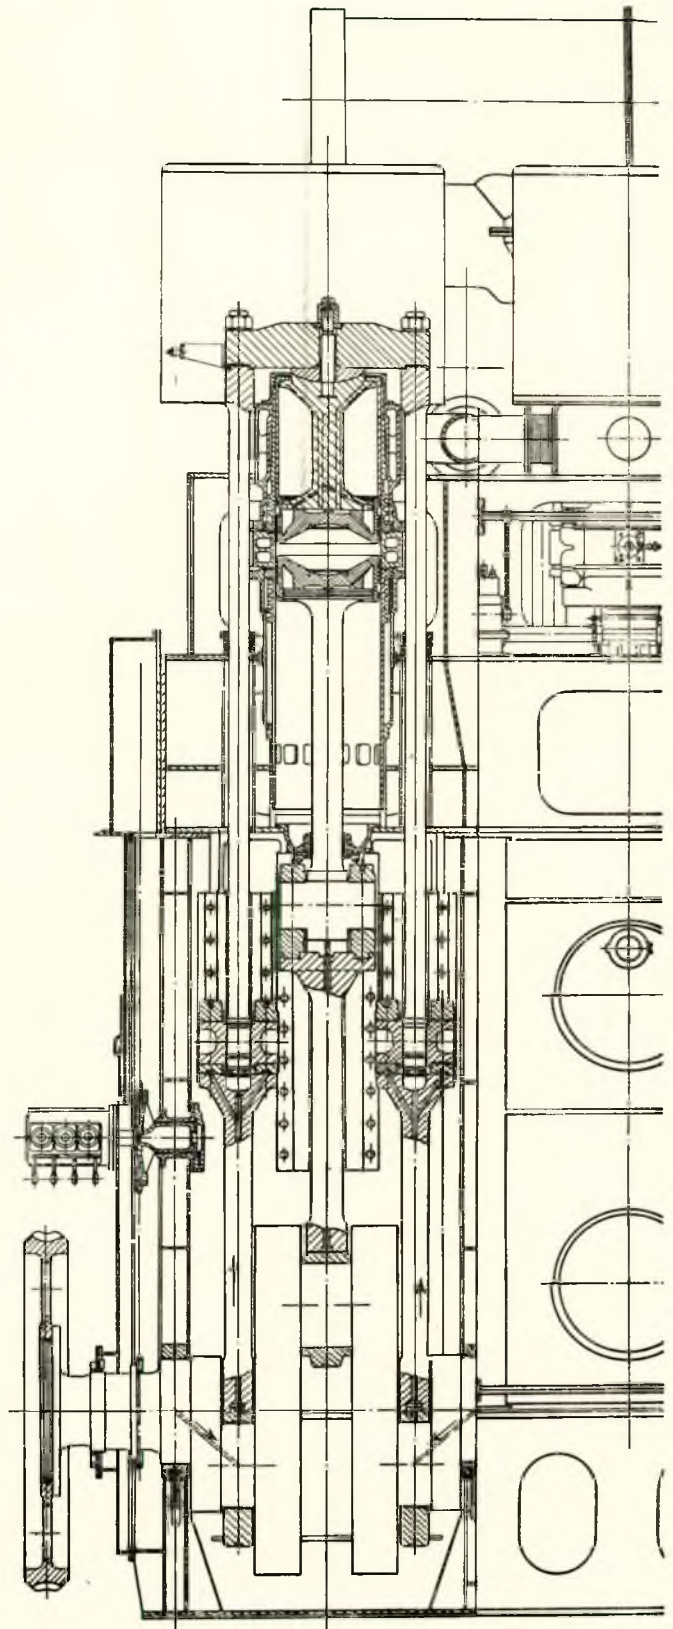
Lubricating oil circuit to the main journals, side rod bottom and top ends
